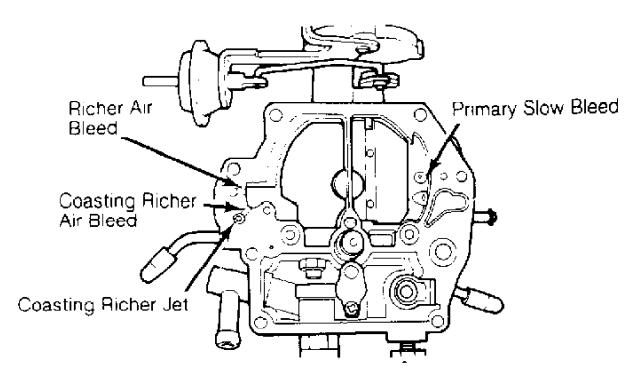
Locating Air Bleeds & Jets (Air Horn) Courtesy of Mazda Motors Corp.
